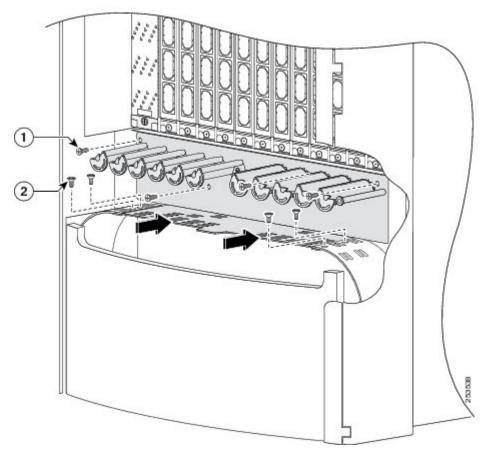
Rear Mid-Chassis Horizontal Cable Guide and Strike Tube
